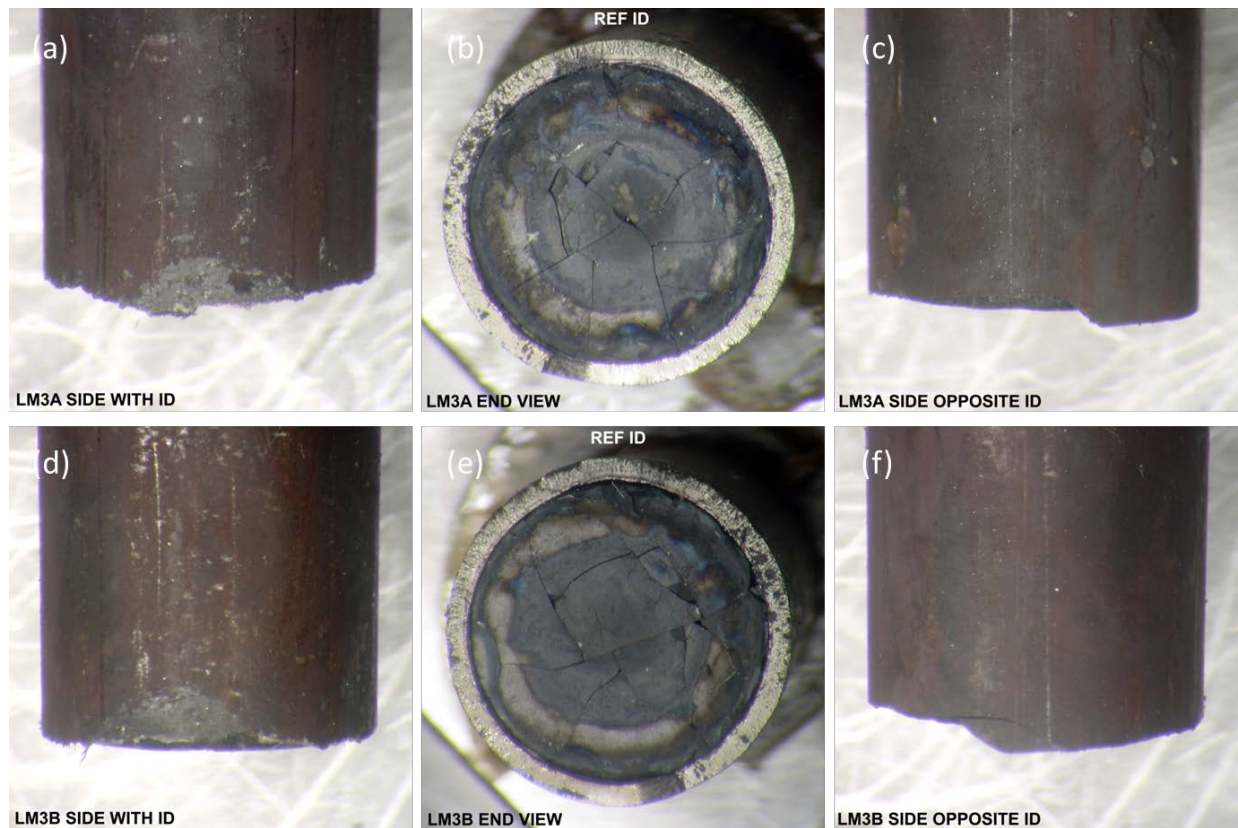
Fracture segments for LMK03/575B-A. (a) and (d) show the specimen ID side of the segment on end caps A and B; (b) and (e) show the mating fracture surface; and (c) and (f) show the opposite specimen ID side of the segment on end caps A and B.
